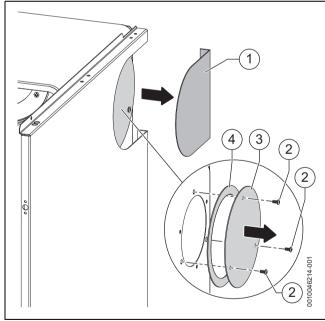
Removing knock-out panel and flue outlet blanking plate (right hand side example)
